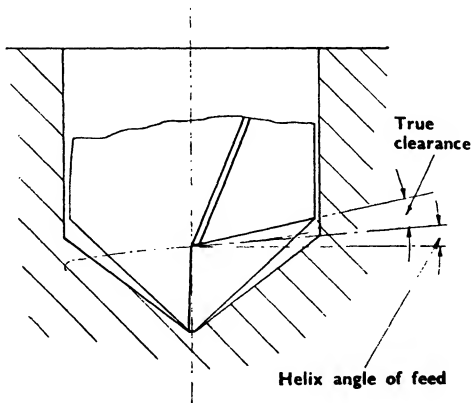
B. DIAGRAM SHOWING TOOL ANGLES FOR A TWIST DRILL
